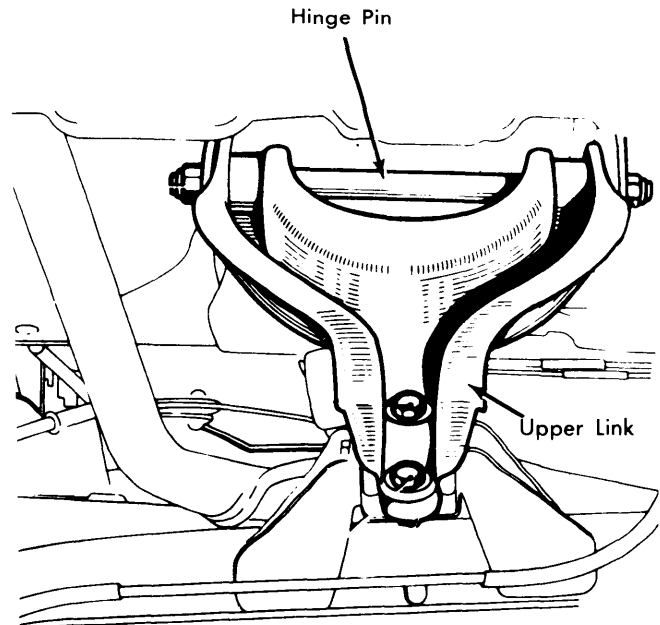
Detail of Rear Suspension Upper Link Assembly
